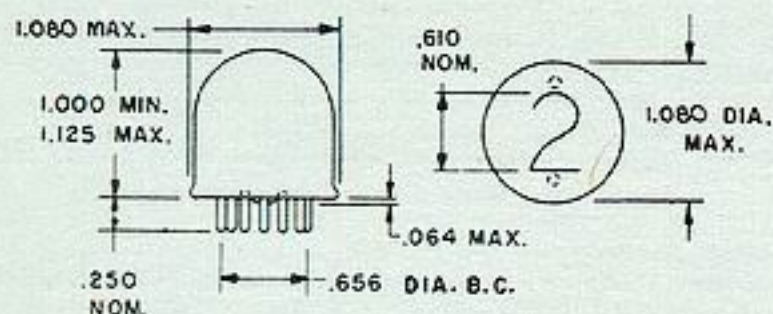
Outline Drawing for 6844A and B5031 Standard Type Tubes
